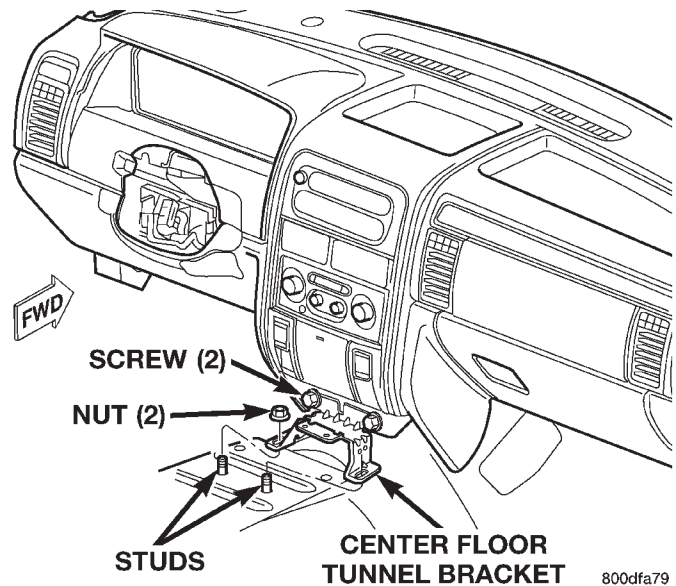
Instrument Panel to Center Floor Tunnel Bracket Remove/Install
